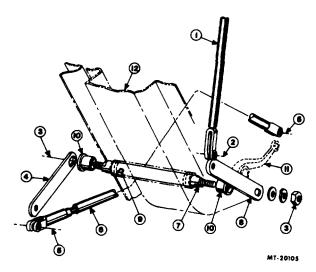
Relay Shaft Details (2200 Series Vehicles)
